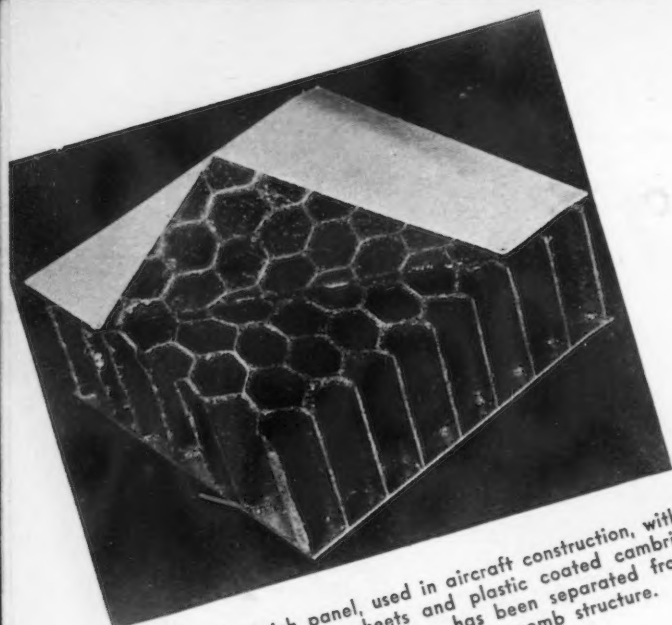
Sandwich panel, used in aircraft construction, with aluminum alloy face sheets and plastic coated cambric core. Upper sheet, in this view, has been separated from core and bent back to show honeycomb structure.
